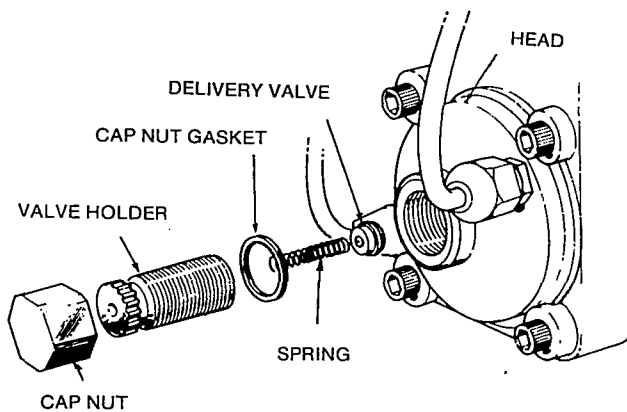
LATE MODEL DELIVERY VALVE ASSEMBLY
